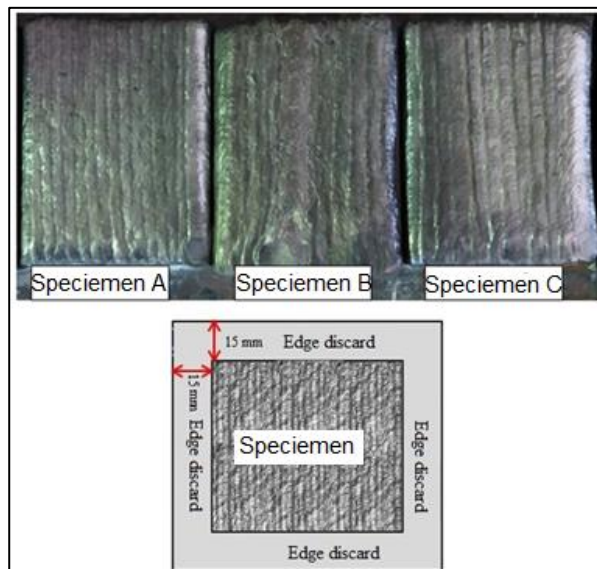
Weld overlay cladding specimens and edge patterning
